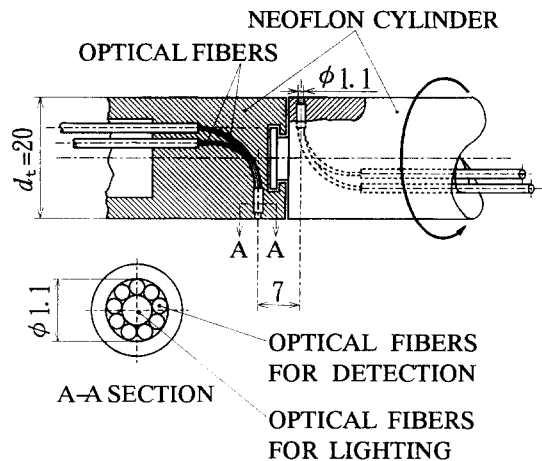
Test tube for measuring particle contact frequency (dimensions are in mm).
